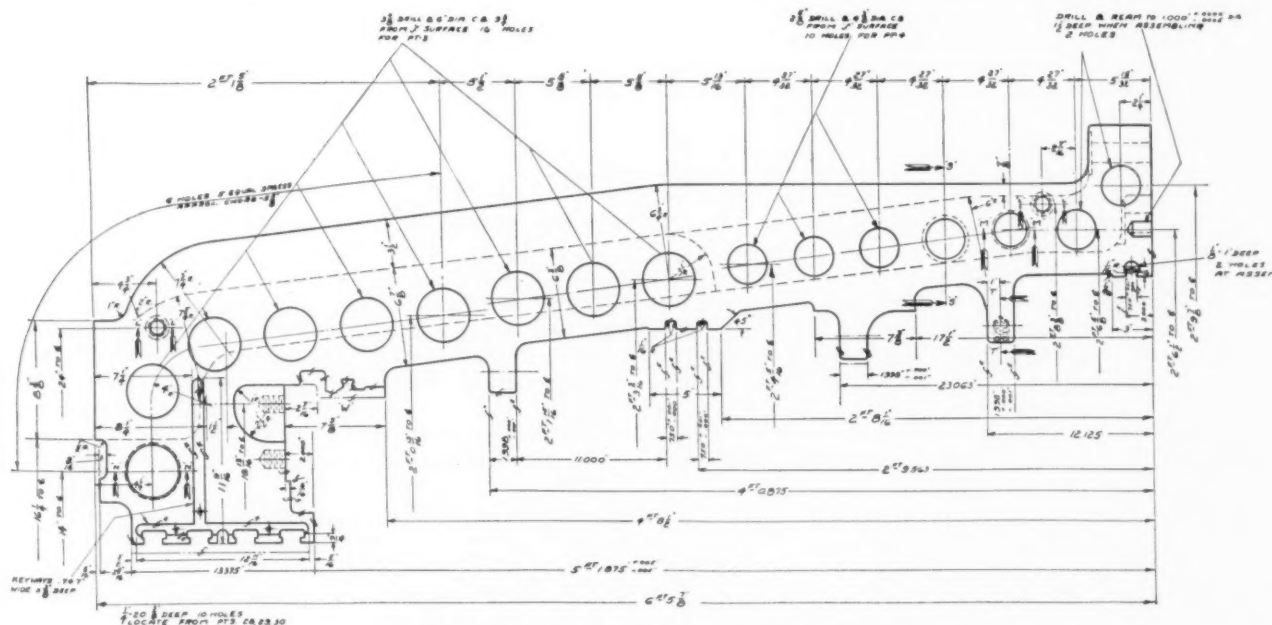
ONE VIEW OF A WELL-DIMENSIONED CASTING
